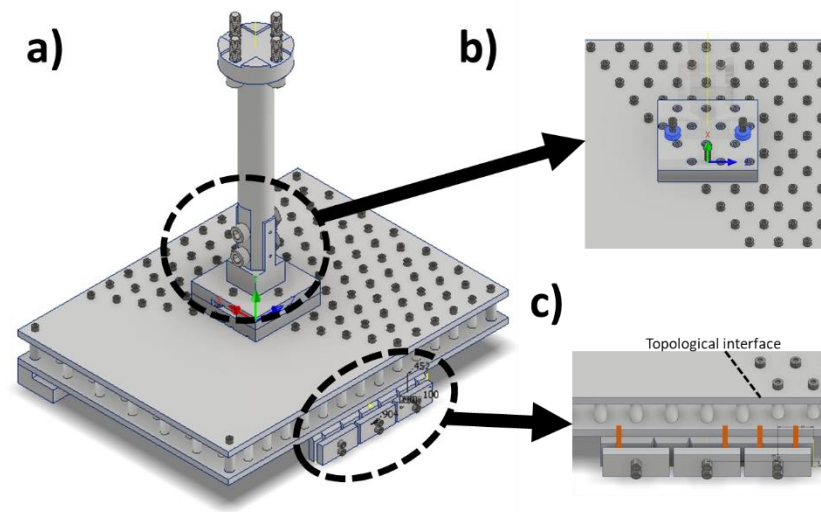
Schematic of parts assembling. a) fully-assembled PTI accelerating structure with fixture to the actuator. b) washers (highlighted blue) for tweaking the pitch alignment. c) probes held by the cable holder. Orange: loop antennas.
